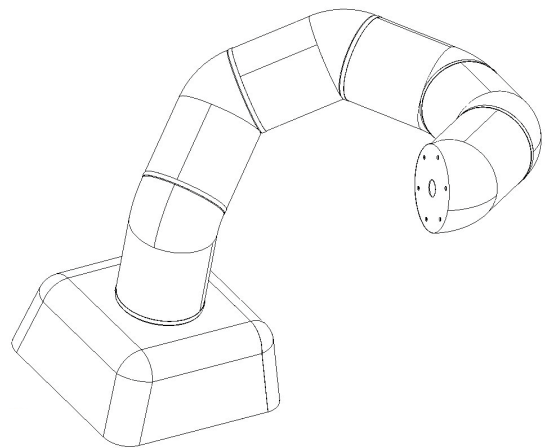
3D model with a modular machine using an extension part and adapted the basic modules with 6DOF
